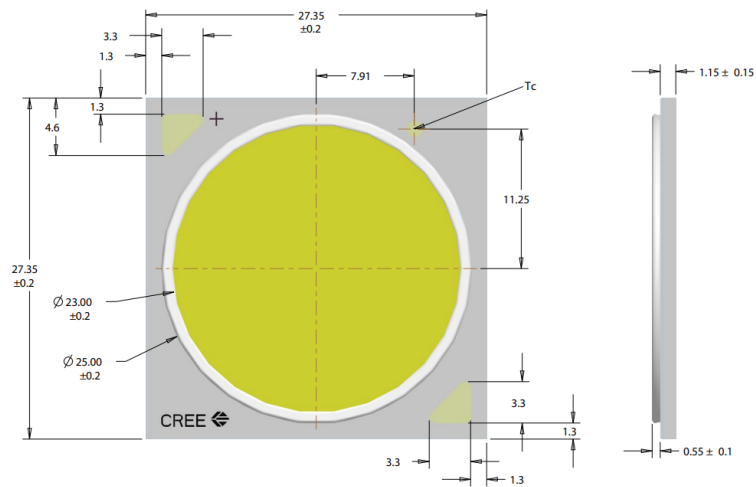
Engineering drawing of the LED that shows its dimensions (in mm)
